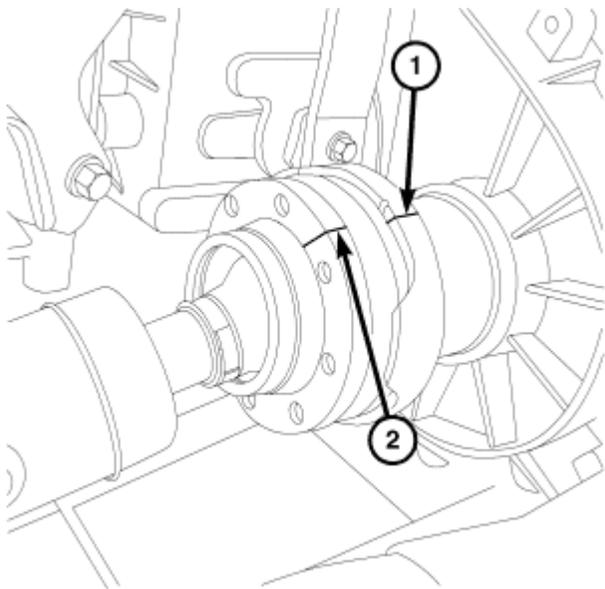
Aligning Installation Reference Marks On Transfer Case Flange Front Shaft CV Joint
